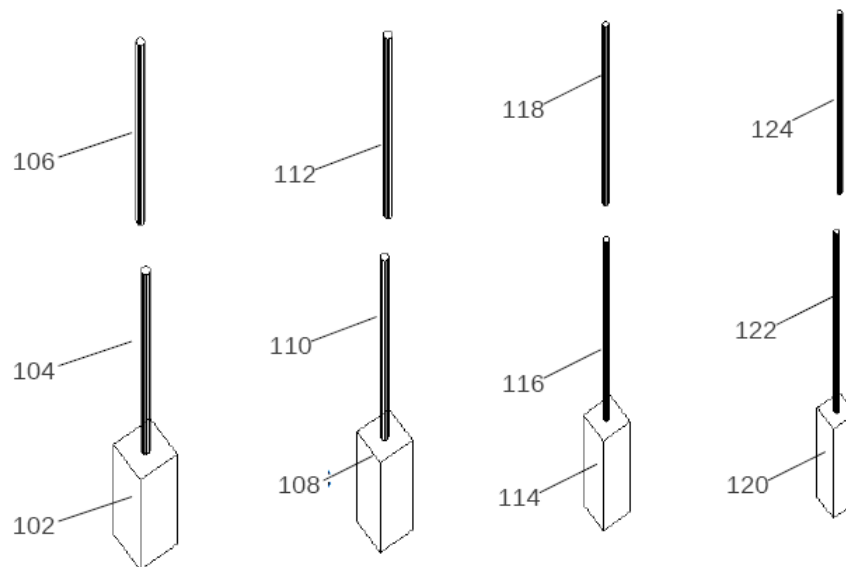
Drawing shows 8 rods and 4 rectangular stands on which rods can be fixed
